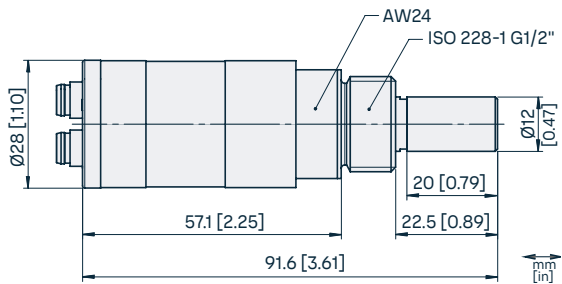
DMT143 with ISO 228-1 G1/2" thread
